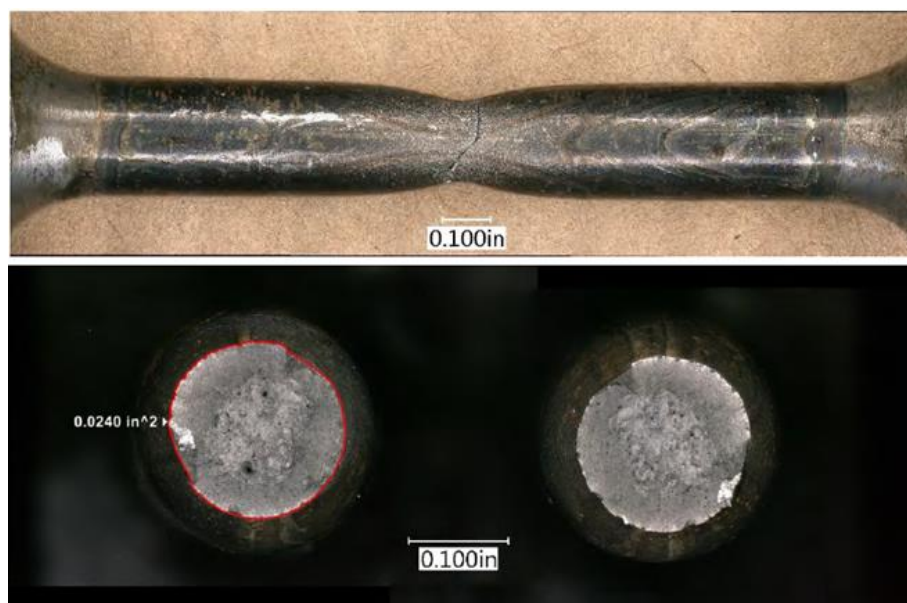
Photographs of Tested Tension Test Specimen QL-17 and Corresponding Fracture Surfaces – Base Metal Plate, Heat No. B4197-2, Longitudinal Orientation, 275°F
